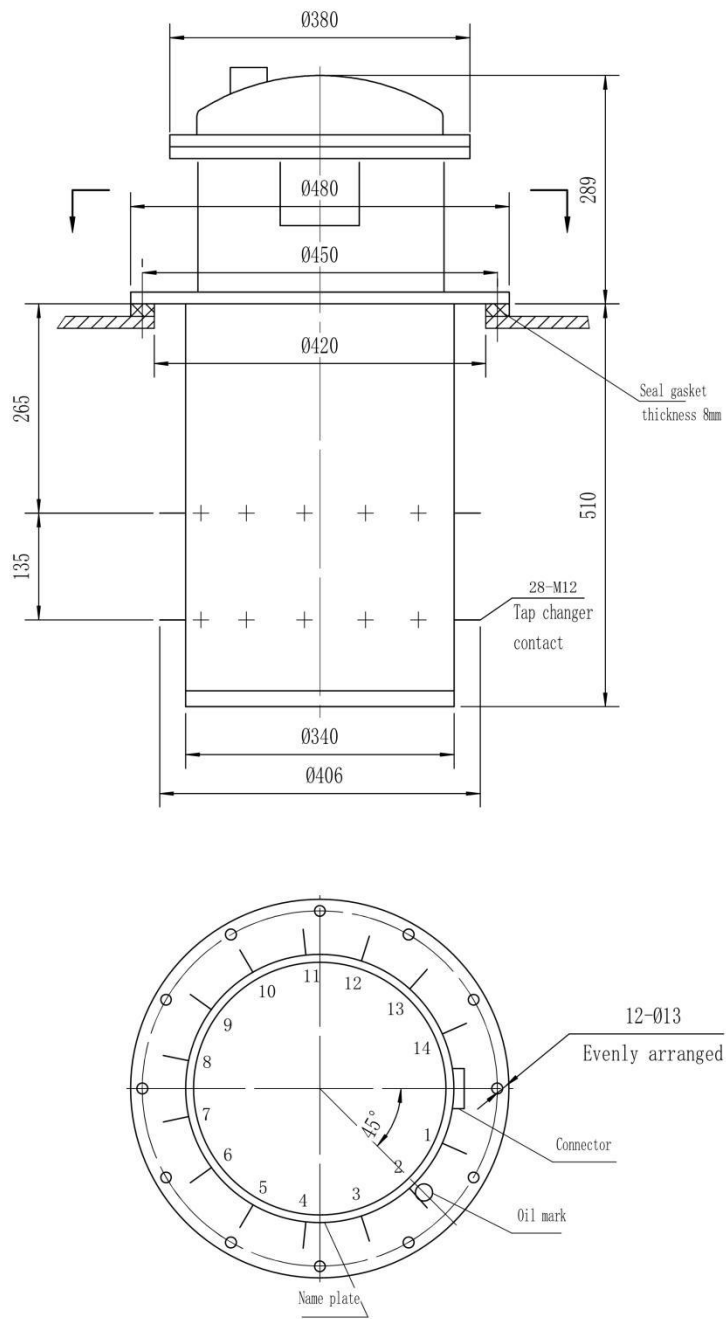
ZS I 100-35-14-X1 outline dimensions diagram
